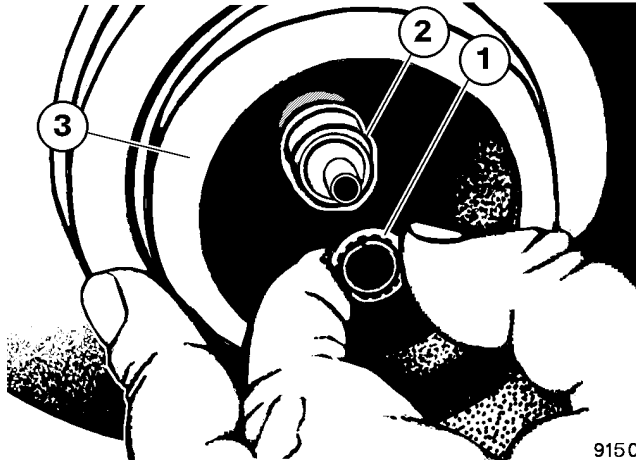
DYNA-SEAL REMOVAL & INSTALLATION
